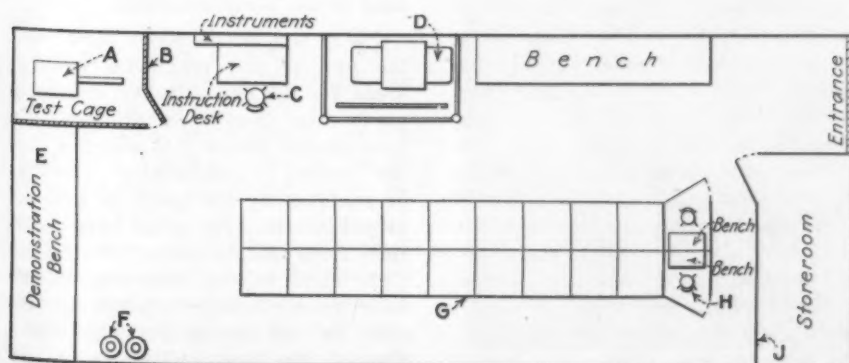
Layout of welding school. Reading from left to right, the various units of equipment are: A, testing machine; B and J, expanded-metal cages; C, instructor's desk and chair; D, multiple-operator arc welding outfit; E, demonstration bench; F, gas tanks; and G, welding booths made of sheet metal and measuring 6 x 6 ft. x 6 ft. high. Ten of the booths are connected to the multiple-operator machine, D, the others having single-operator sets which may be mounted overhead or on the wall back of the booth. Benches and chairs (H) are located at the end of the line of booths, as shown.
